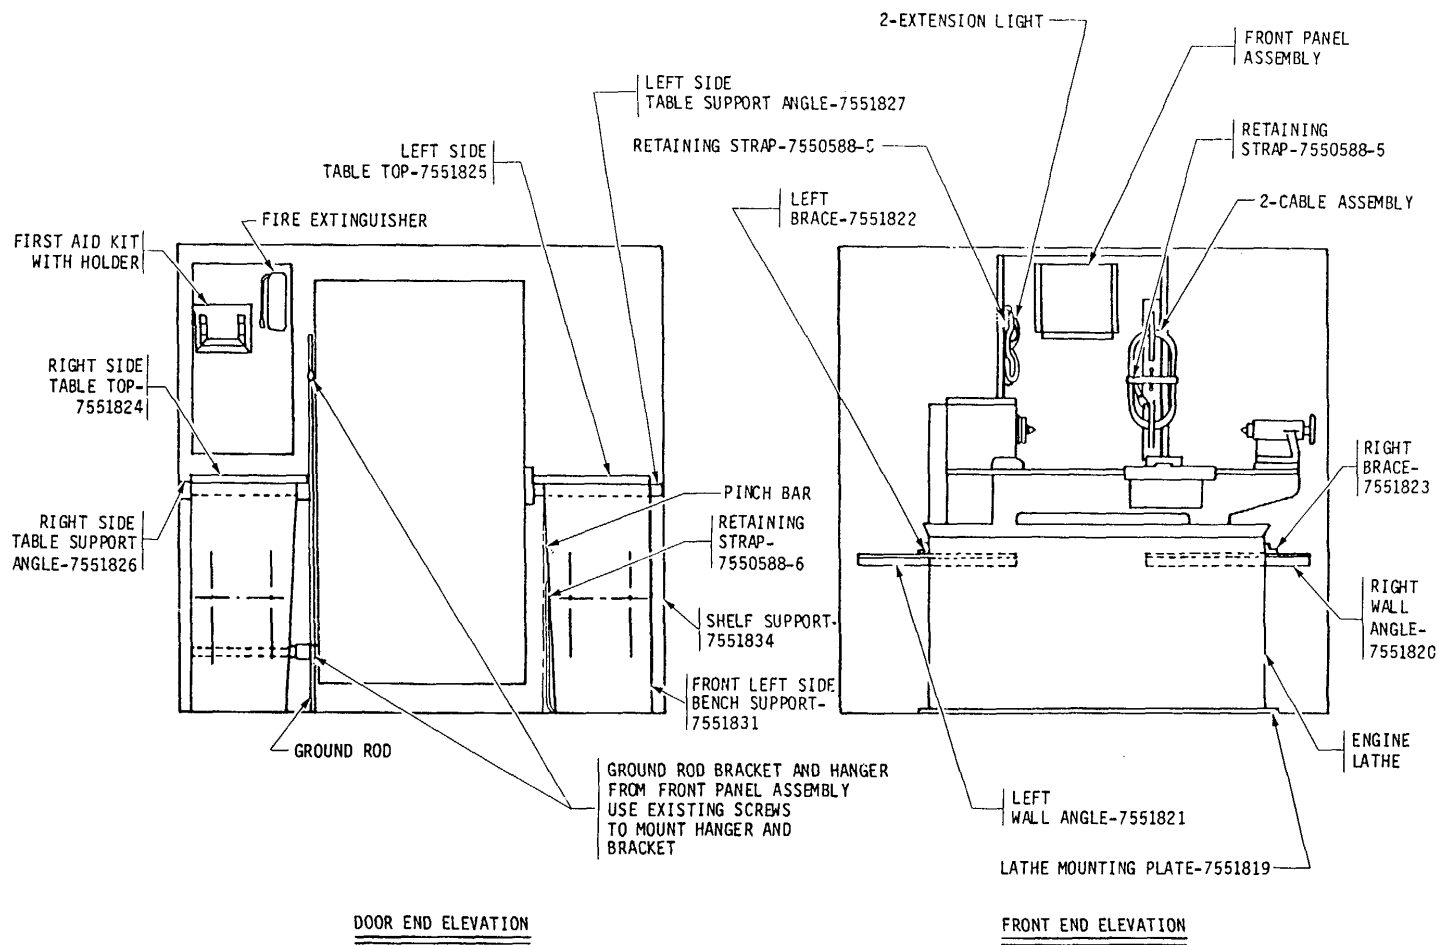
Components to be mounted, door and front end elevations, unit 1, 280.
